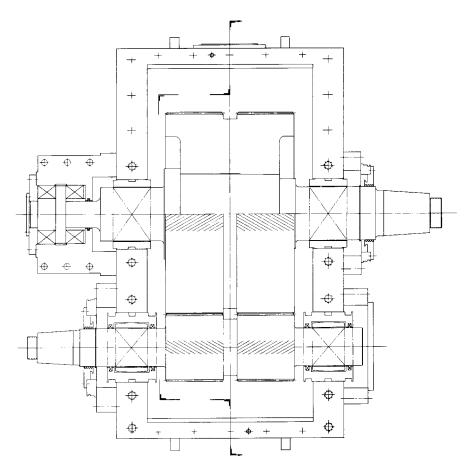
Plan cross section, typical industrial gear. (Source: Demag Delaval.)
